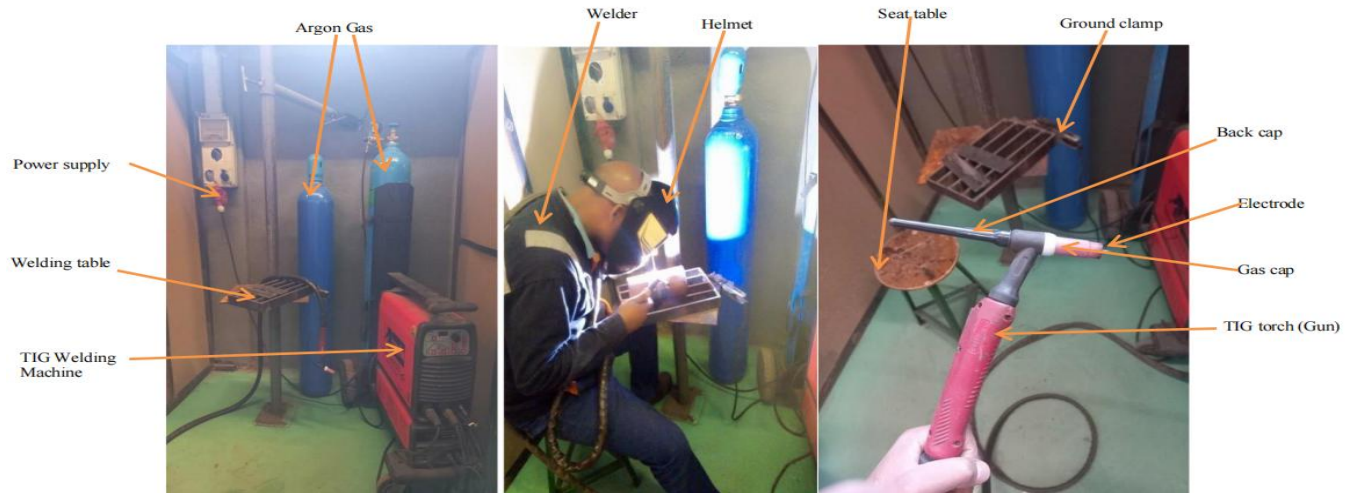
SUPERIOR TIG 322 AC/DC-HF/LIFT model machine and specimens for welding
